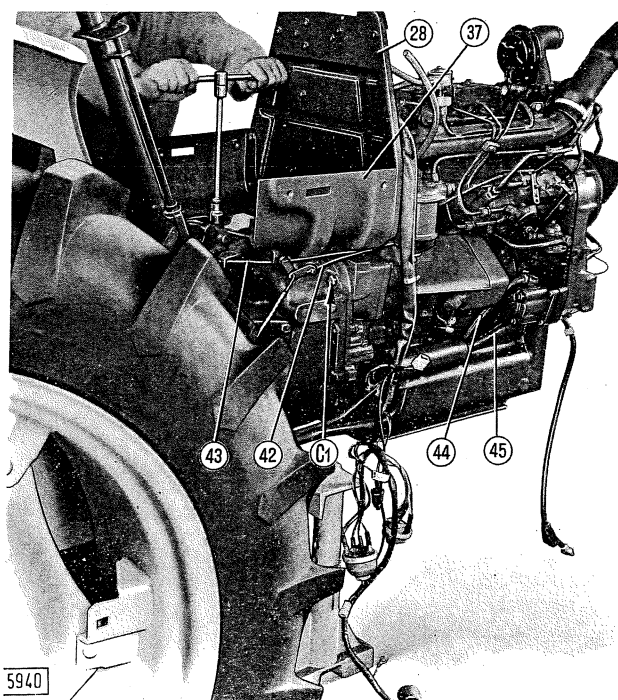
/9 - Removing fuel tank mounting (37) with electric control box mounting plate (28).
